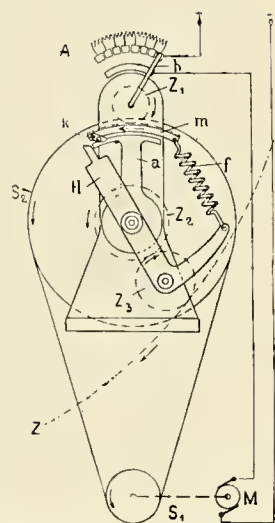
MOTOR STARTER, ELECTRIC CONNECTIONS AND CUT OUT MACHINISM.
